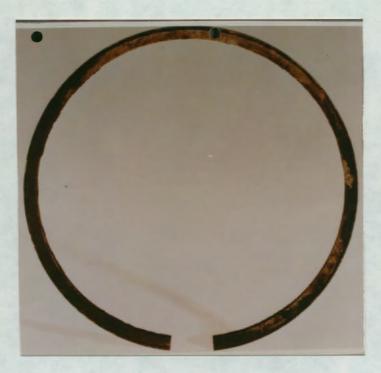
A photograph showing the carbon deposits on the top side of a typical number one piston compression ring.
